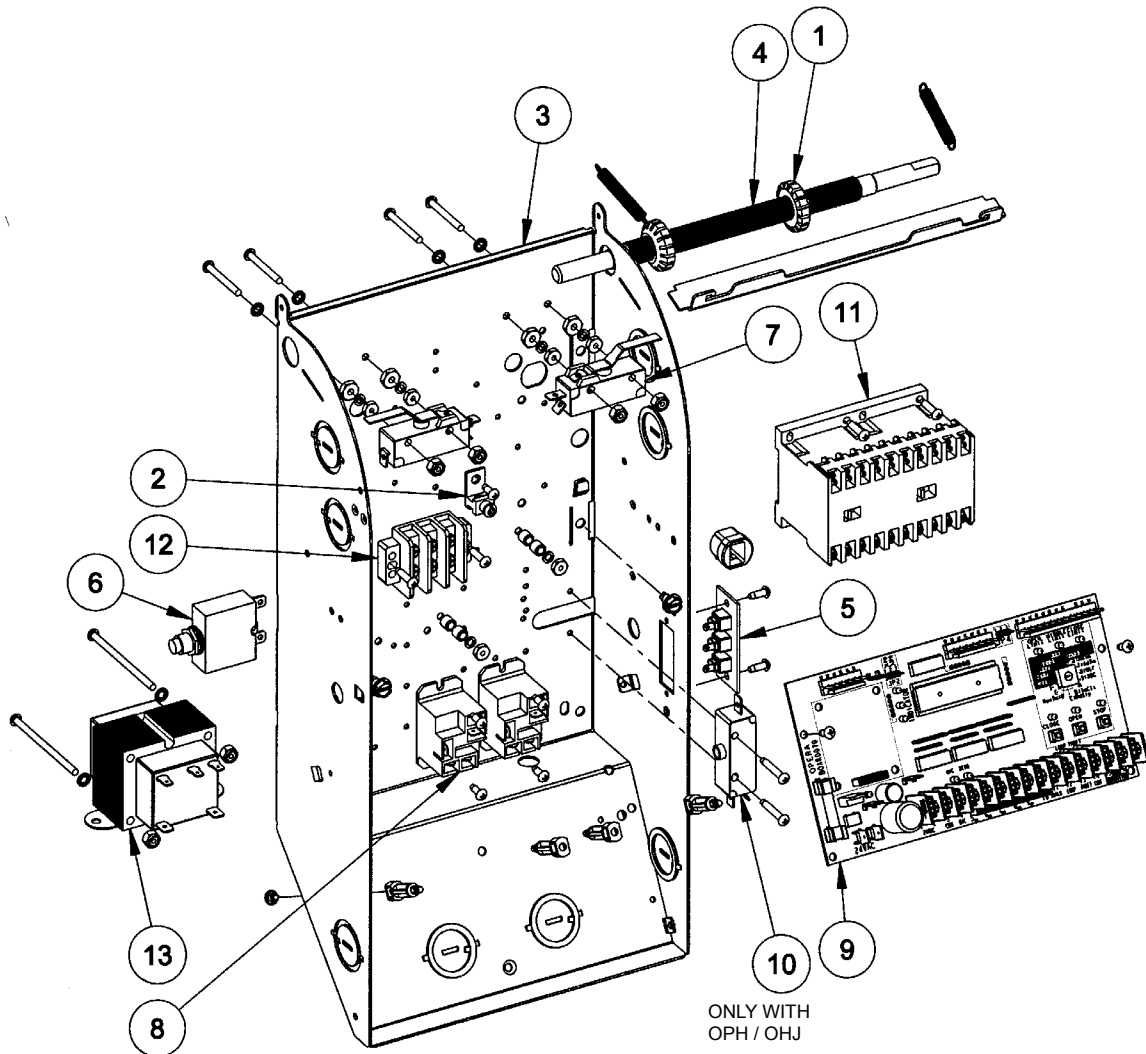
Control Box MOD 110 Mechanical Exploded View
